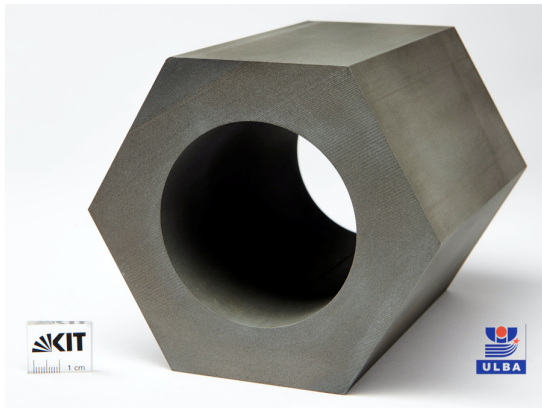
Hexagonal TiBe₁₂ block after final machining
